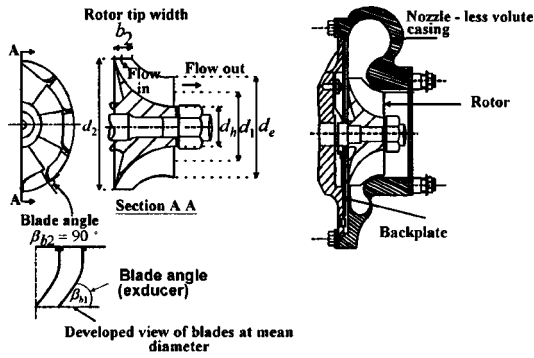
The geometrical shape and the principal dimensions of the IFR gas turbine
